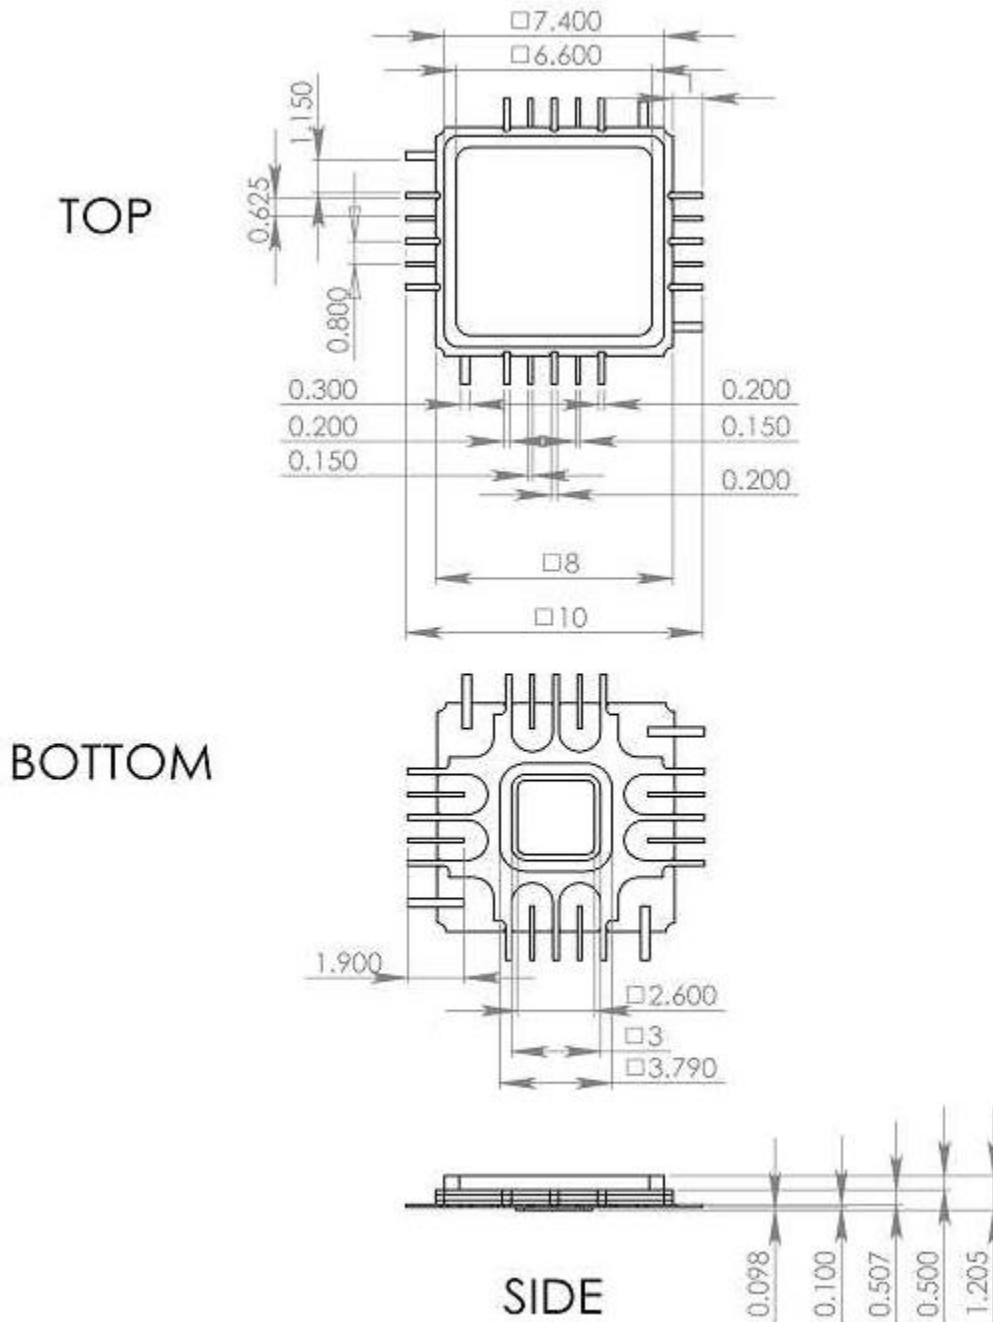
CQFP 24-Pin Package Drawing (All Dimensions in mm)
